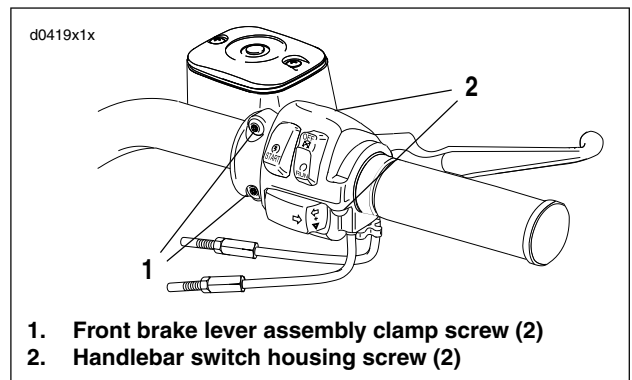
Handlebar Lever and Control Mounting Screws (Right Side Shown)
